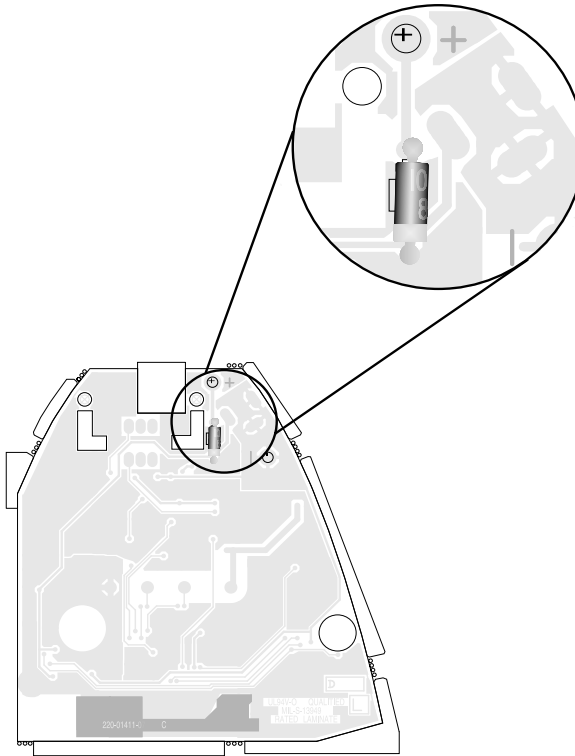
The Tait Orca Fast Charger PCB. The inset shows where to place the diode (1N4001 or similar) for using the PCB in a multi-charger
